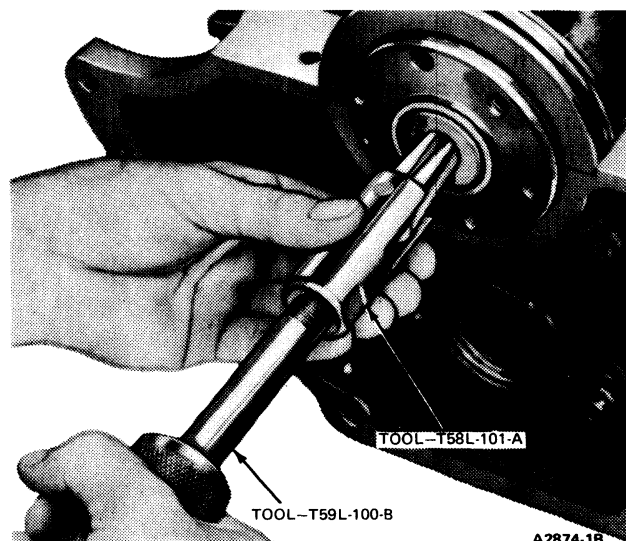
Removing Clutch Pilot Needle Bearing Assembly
